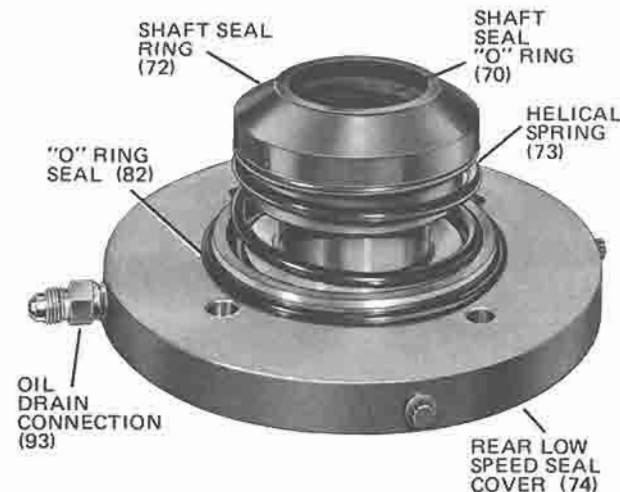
REAR LOW SPEED SHAFT SEAL COMPLETELY ASSEMBLED
